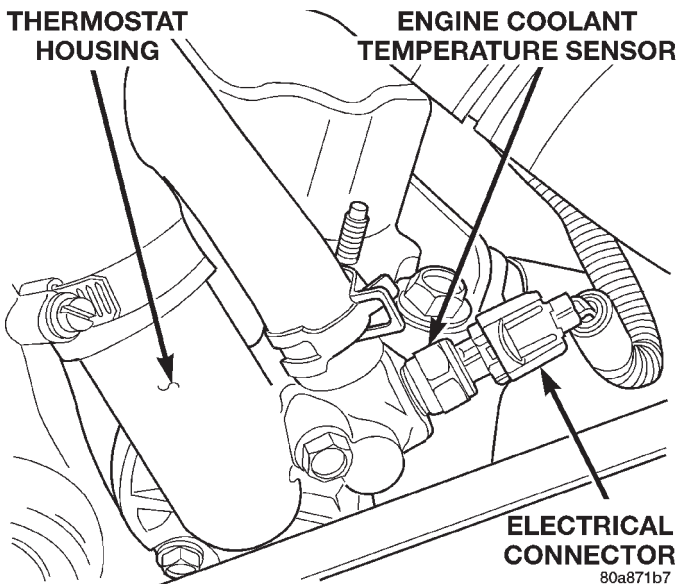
Engine Coolant Temperature Sensor—4.0L Engine
